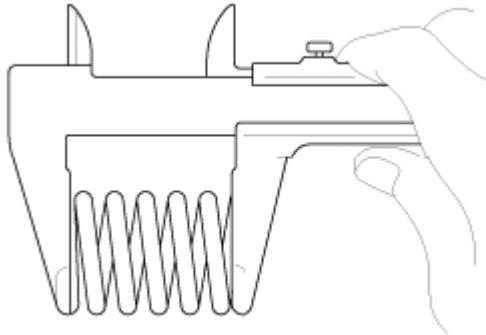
Measuring Free Length Of Valve Spring Using Vernier Calipers
